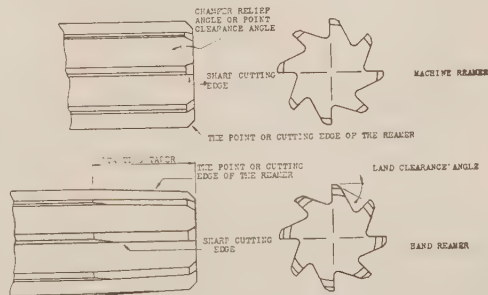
CUTTING ENDS OR POINTS, SHOWING CUTTING EDGES AND CLEARANCES
